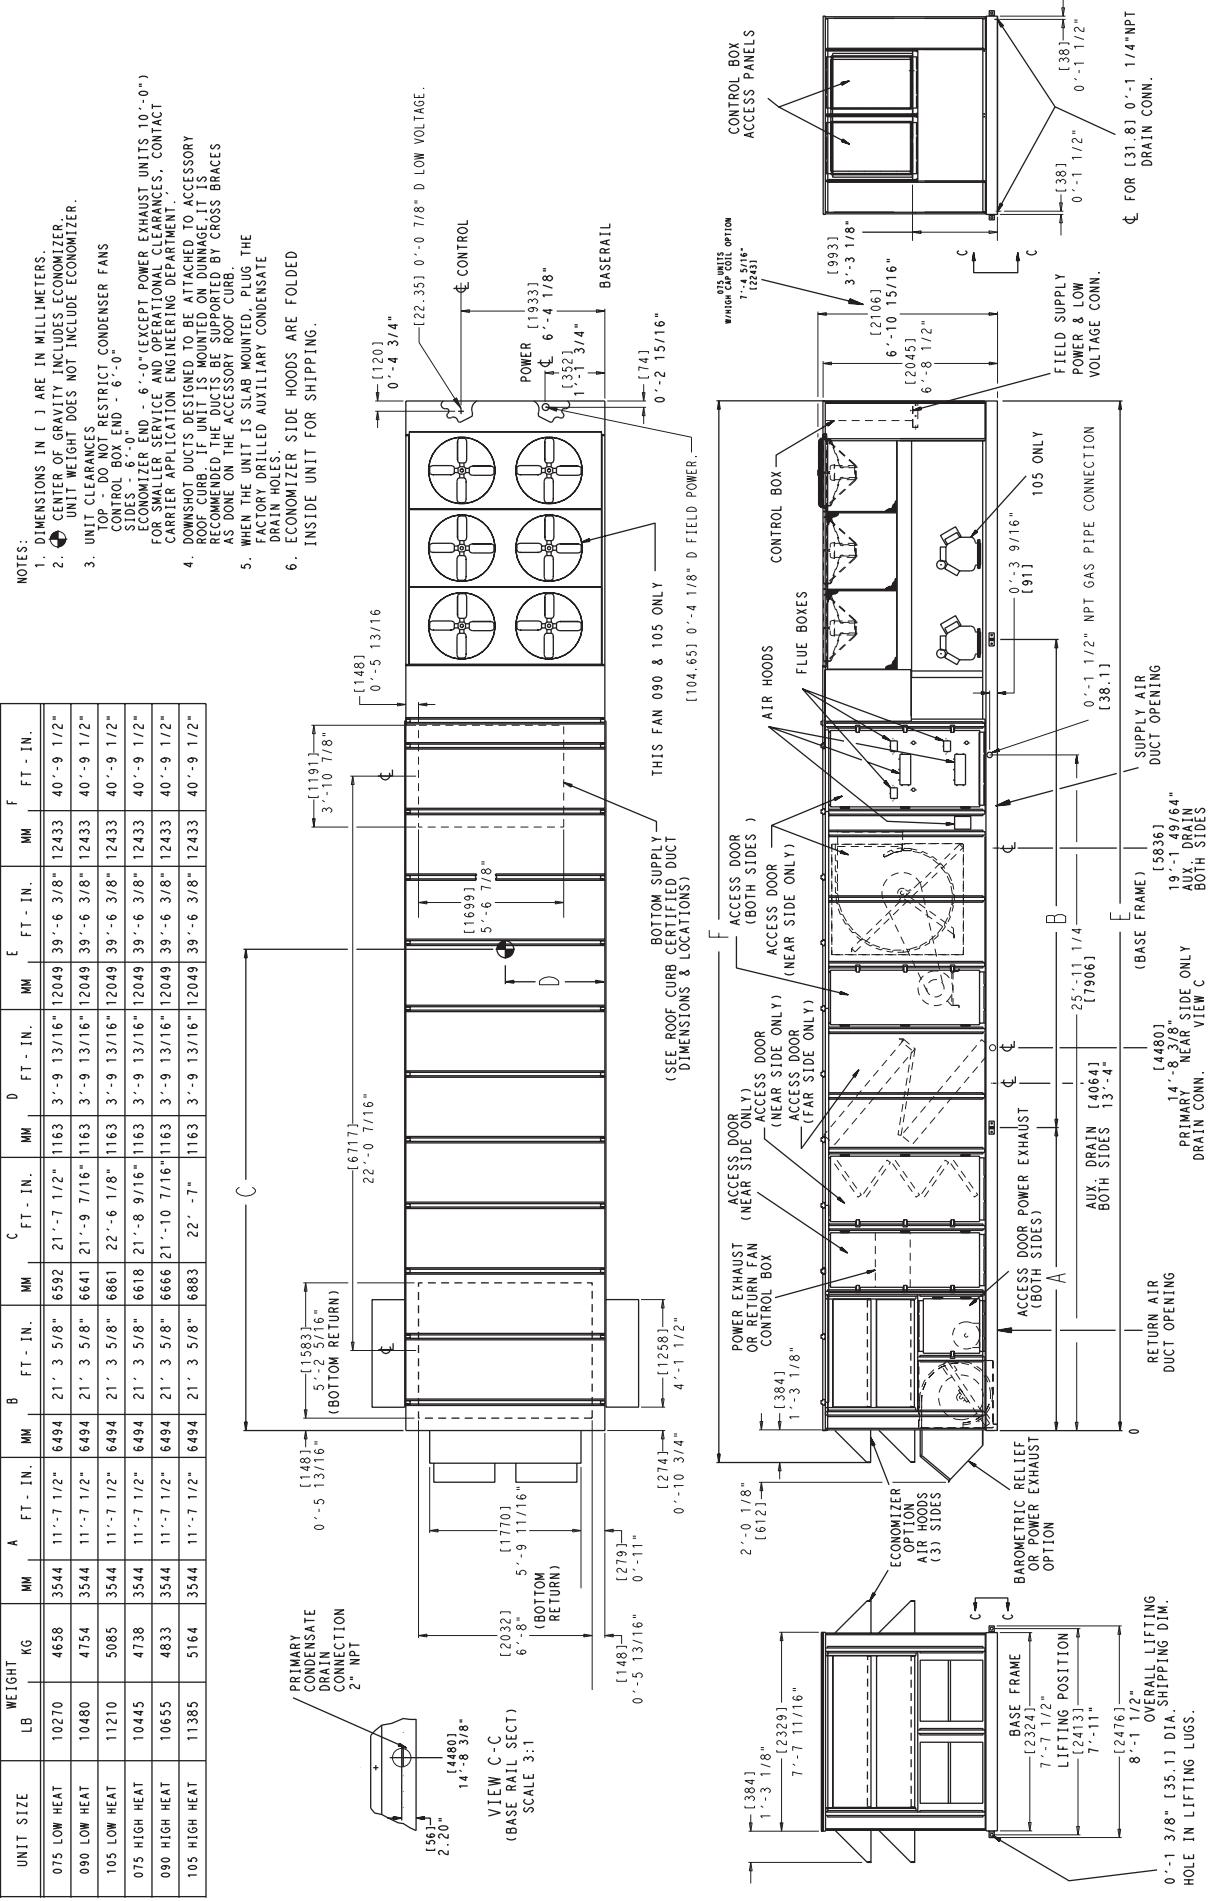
Base Unit Dimensional Drawing — 48ZGZN075-105 (Standard Chassis)
